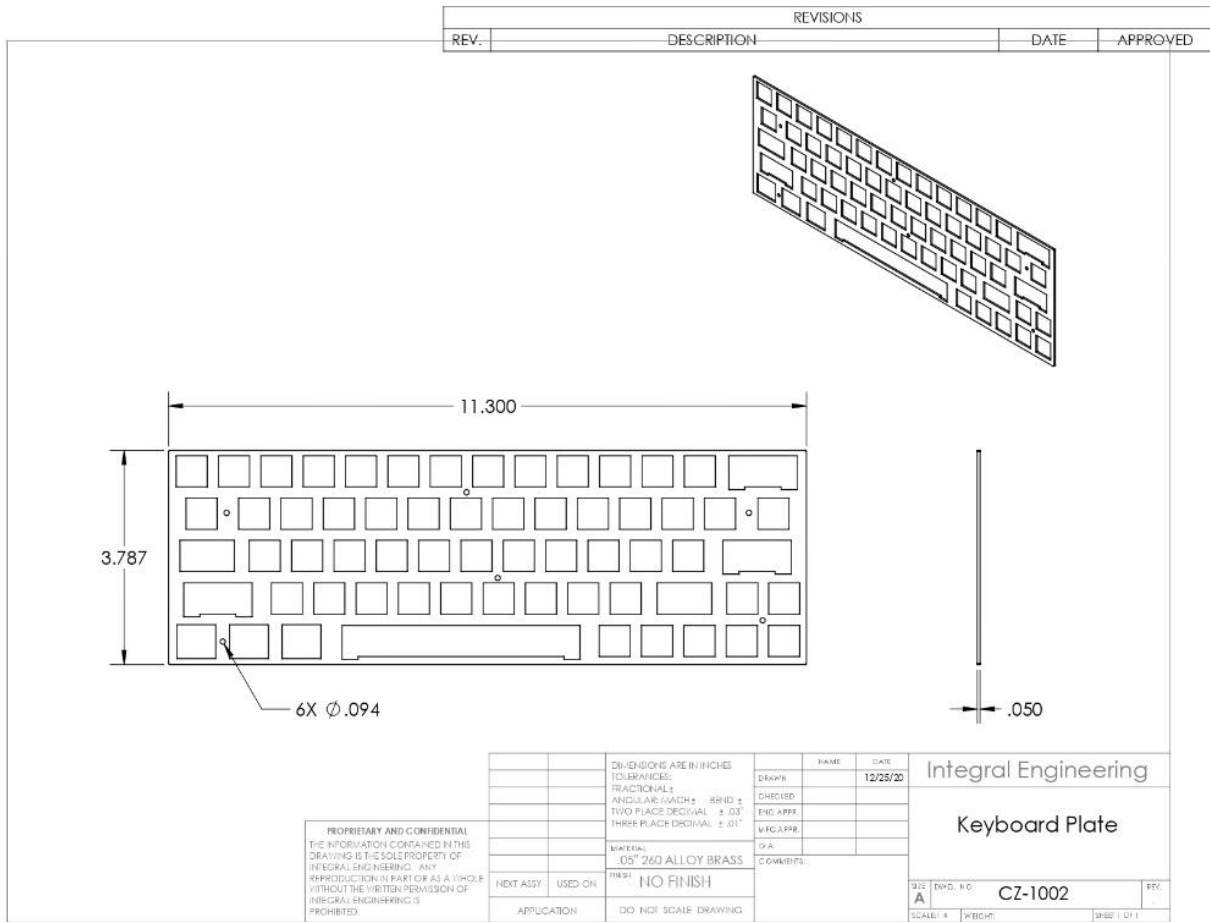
2D CAD drawing for CZ-1002 (Keyboard Plate).
